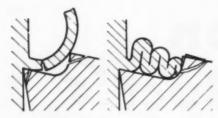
Overbreaking, crowding, and tool breakage caused by too steep a slope.
